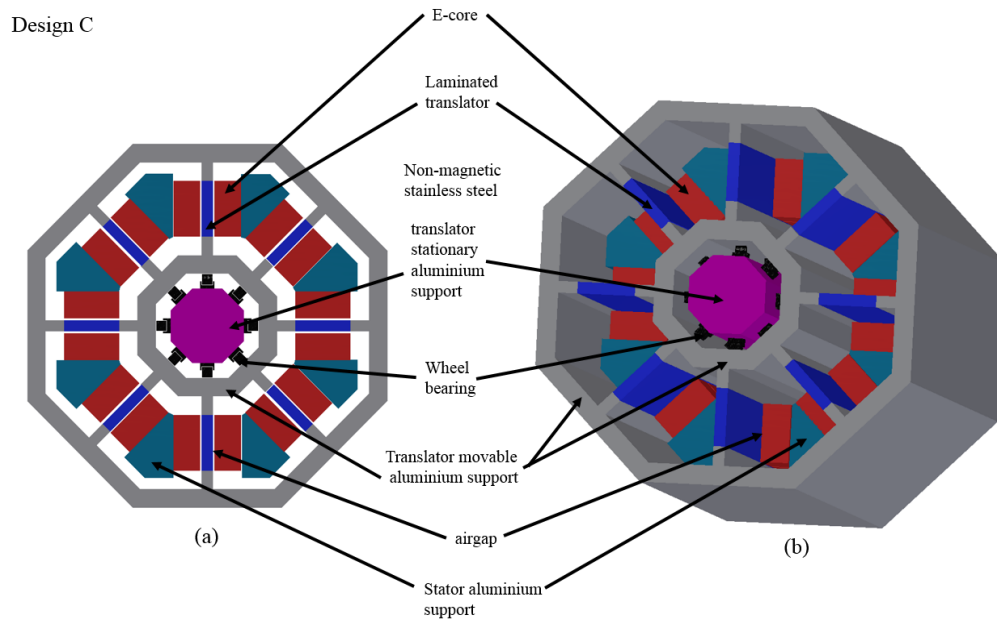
6: Design C structure (a) top view (b) 3D rendered view
